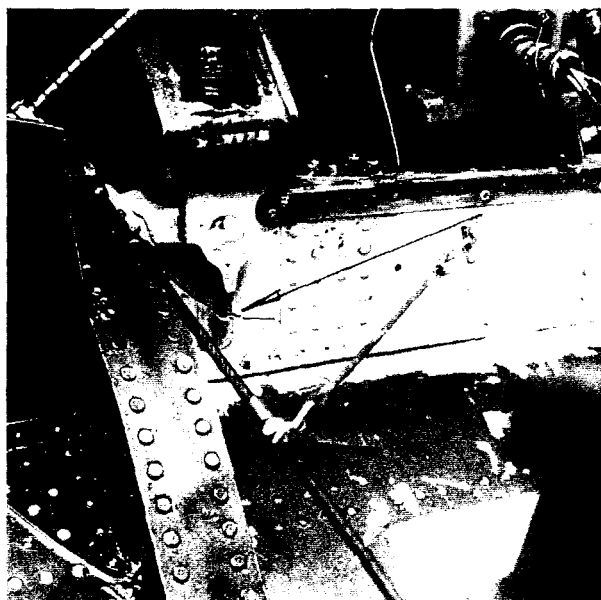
SEA KING: STARBOARD REAR MAIN GEARBOX SUPPORT CASING CRACKED
